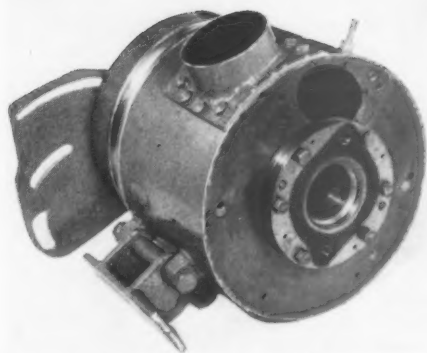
Complete machine, showing brackets for engine mounting and blanked-off alternative port position
